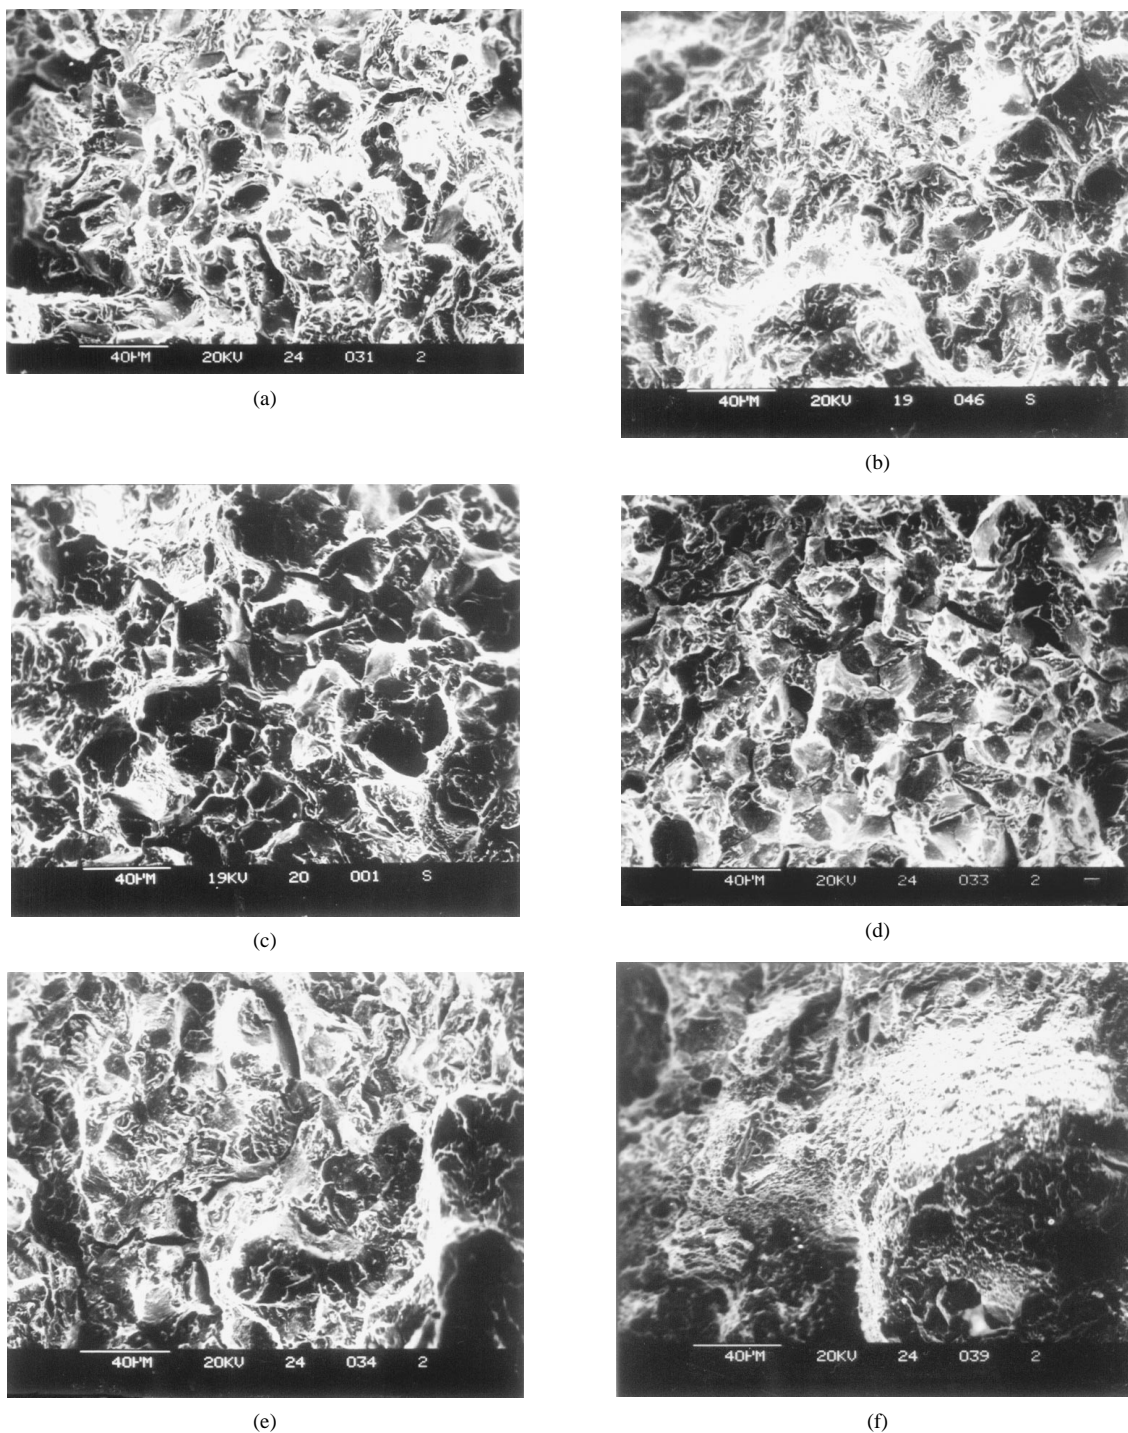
Fractographs of impact specimens fractured at -40°C for (a) 1 h, (b) 5 h, (c) 24 h, (d) 80 h, (e) 350 h, (f) 1000 h holding at 538°C .
